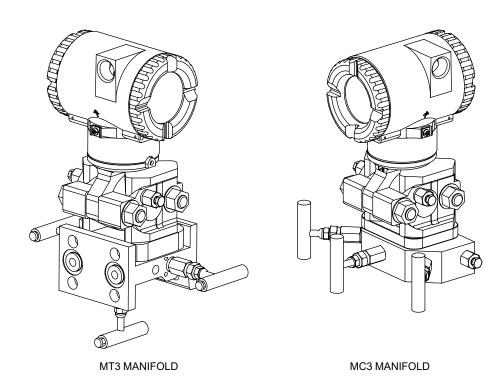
Typical Mounting on a Coplanar™ Manifold
